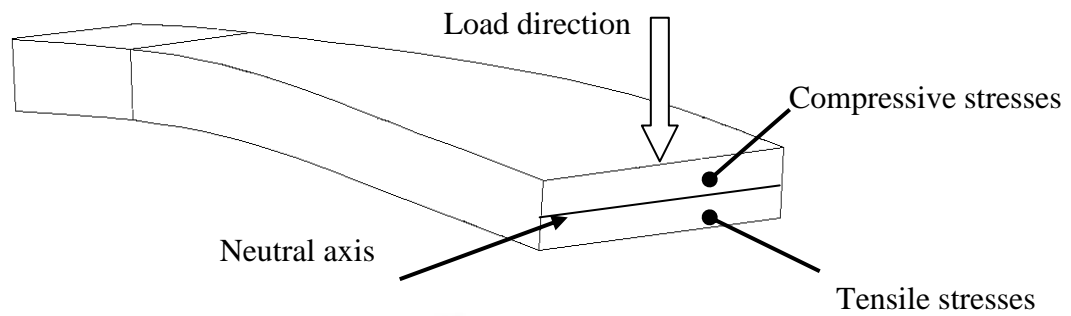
Schematic of the investigated fractured surface of leaf spring
